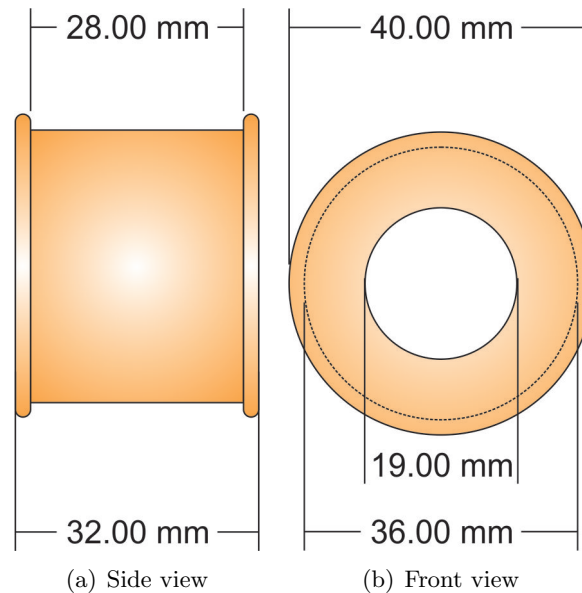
Copper cylinder dimensions. (a) Side view and (b) front view of the rig copper cylinder (test area).
